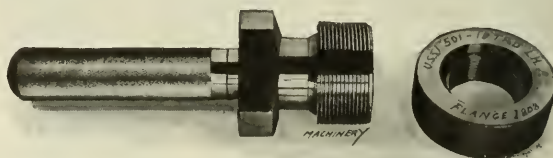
Internal and External Thread Gages ground on International Thread Grinder
